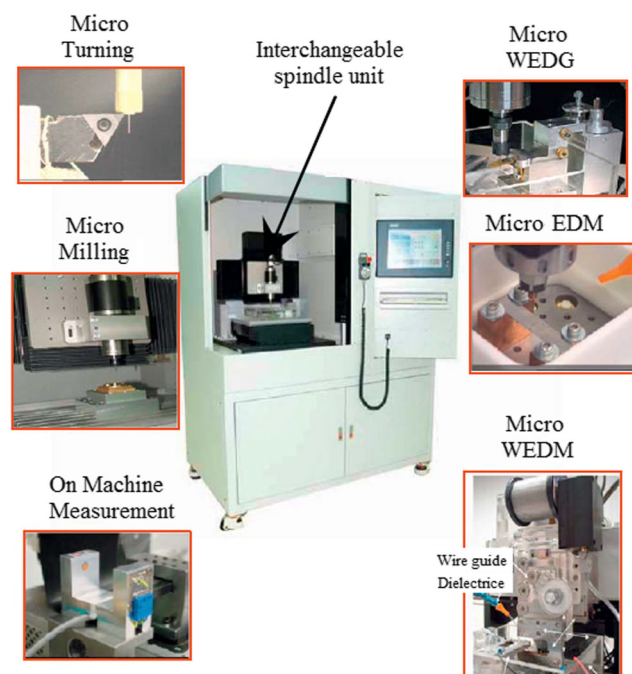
Hybrid machine for multi-processes of micro-machining [4]
